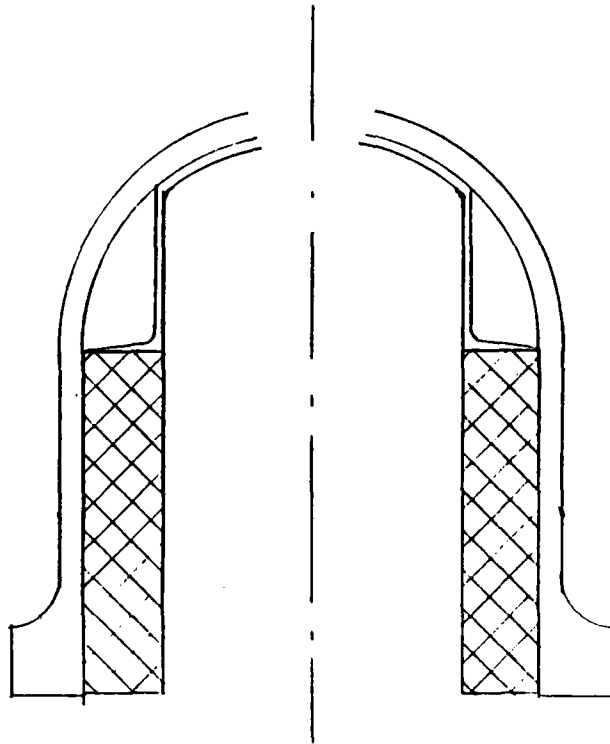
Housing/Regenerator Interface Using a Stuffer Piece
